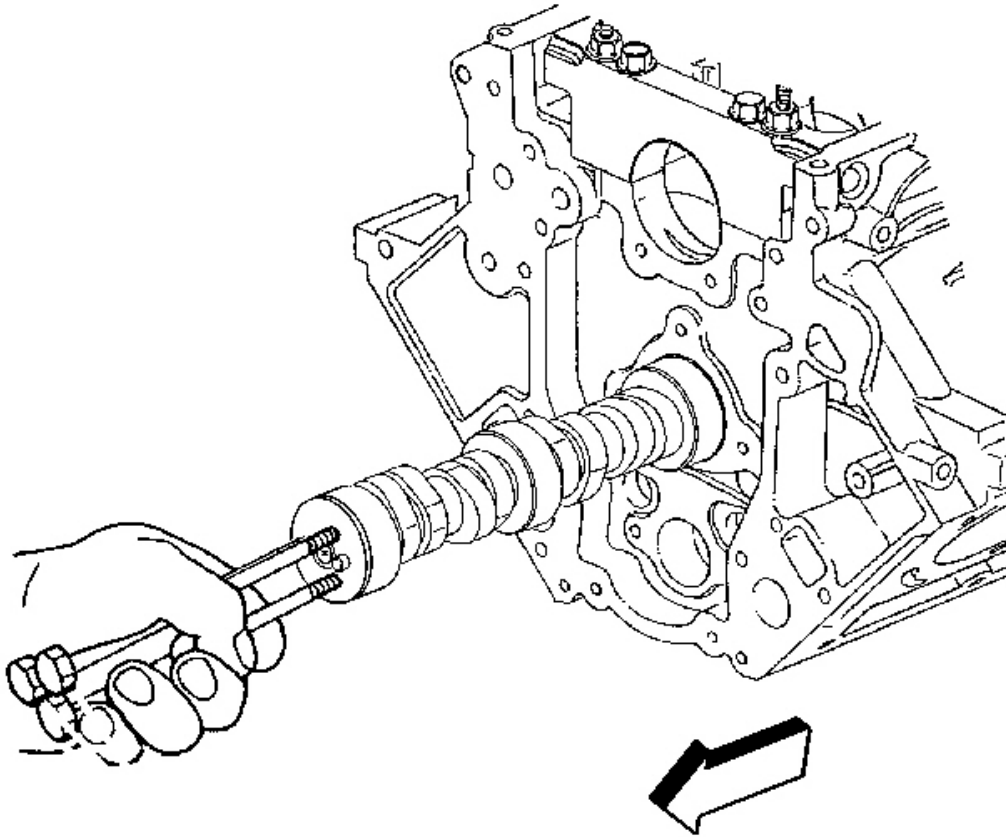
View Of Bolts installed In Camshaft Front Bolt Holes
